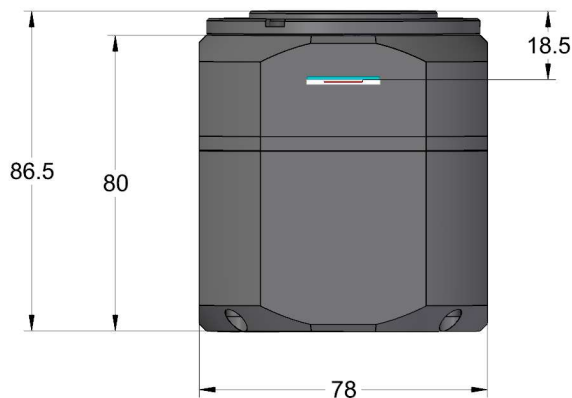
C1+ camera head with C1 compatible adapter side view dimensions
